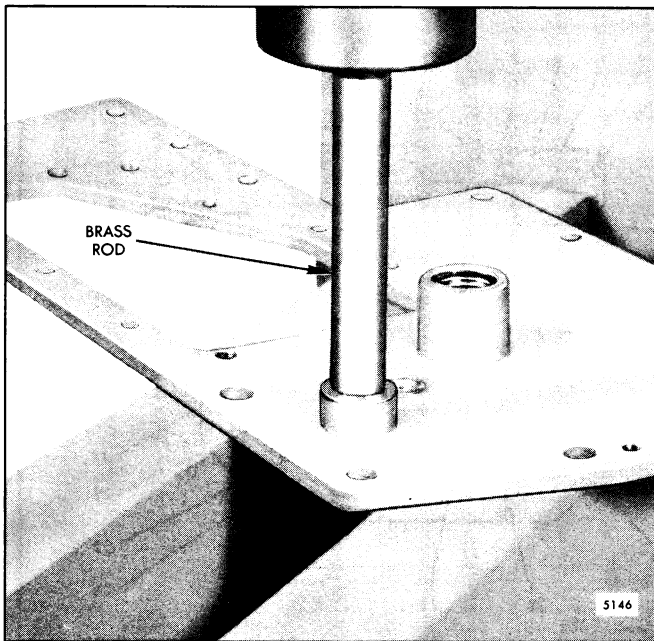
Removing Bushing From Stop Lever Shaft Opening In Cover
